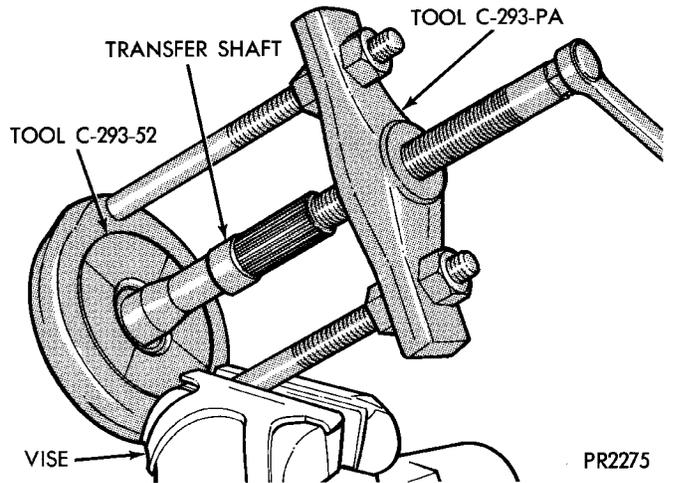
Remove Transfer Shaft and Bearing Retainer Assembly
